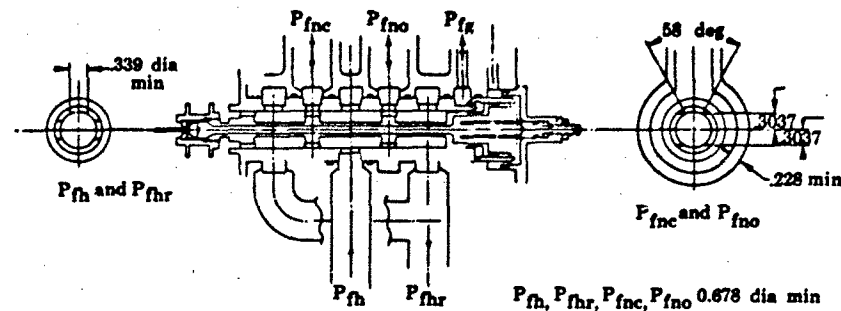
Duct Heater Exhaust Nozzle Control Valve Layout (Unitized Fuel and Area Control - Bendix)
